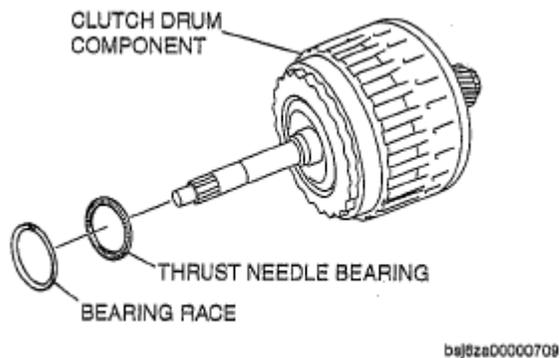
Identifying Bearing Race, Thrust Needle Bearing And Clutch Drum Component
